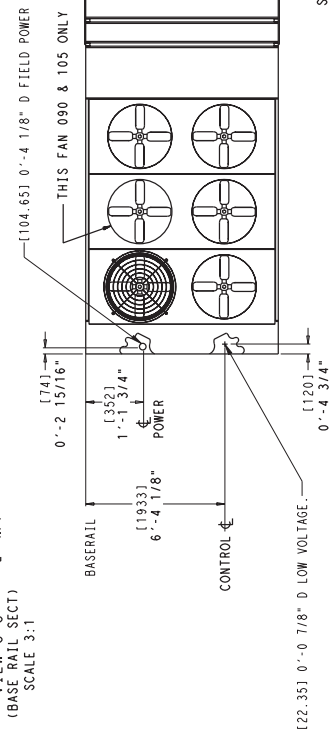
Base Unit Dimensional Drawing — 50Z6,Z8075-105 (Return/Exhaust Fan Units)
